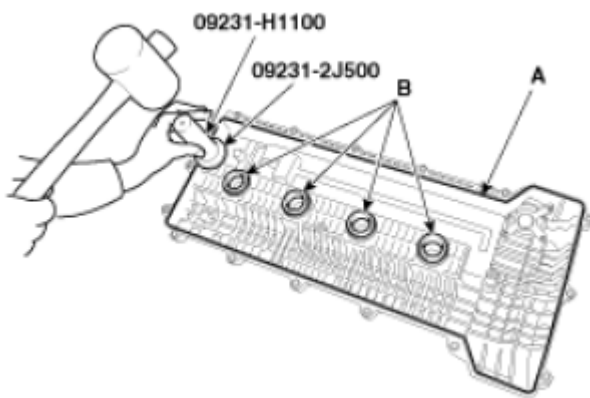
Installing Oil Seal And Gasket Using SST (09231-2J500, 09231-H1100)
